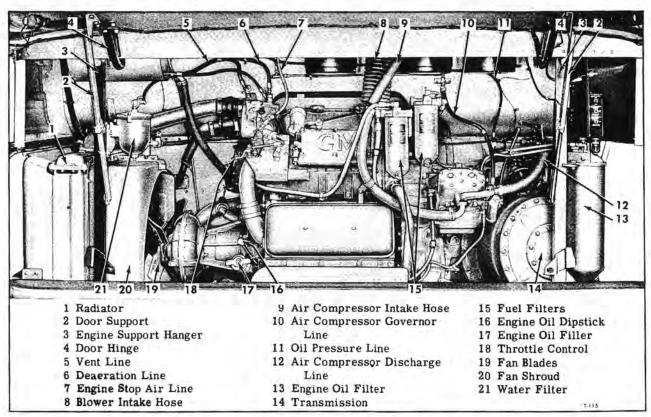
Power Plant Assembly Installed—6 Cylinder with Hydraulic Transmission
